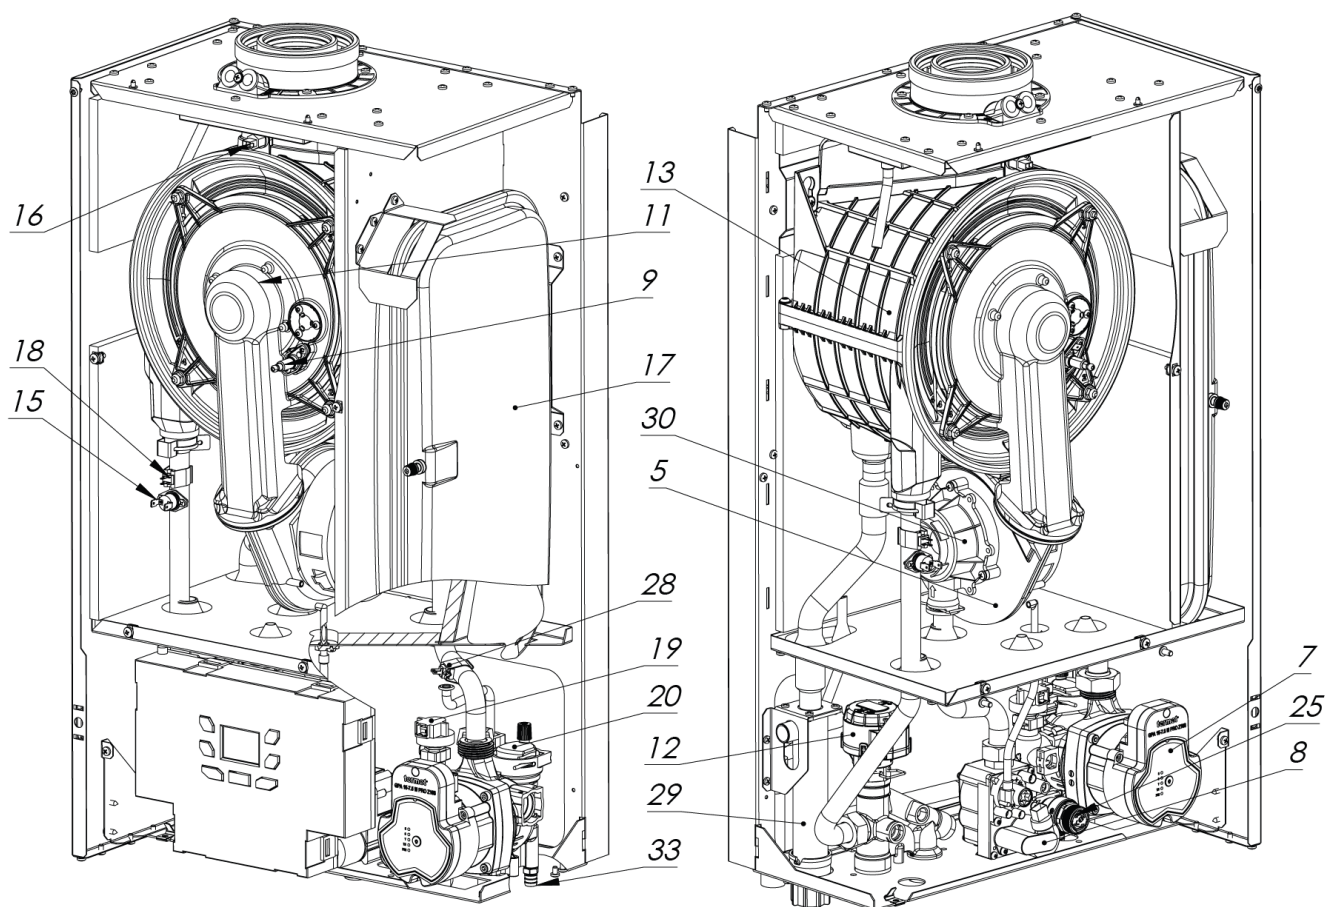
Component layout of the GCB-S57 system boiler
